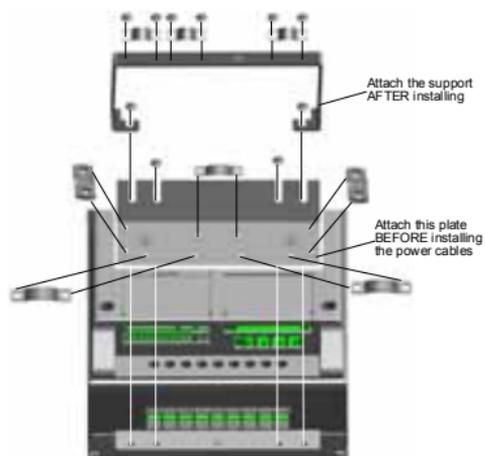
Attaching the PE-plate and API cable support, MI4 - MI5
